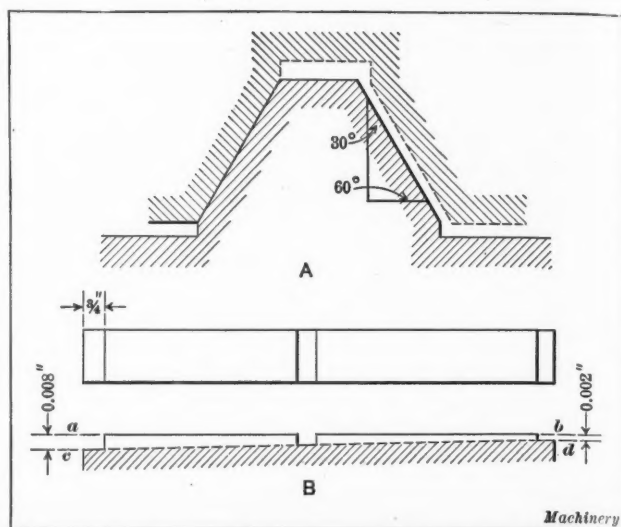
(A) Section of V-shaped Way. (B) Method of establishing a Surface from a Base Surface
